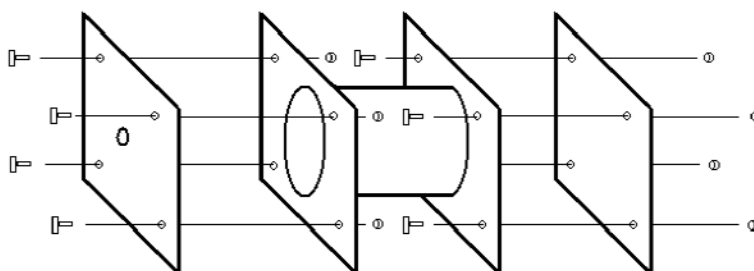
Initial apparatus exploded schematic without flow through pipes shown. Single LED hole shown in left plate.
